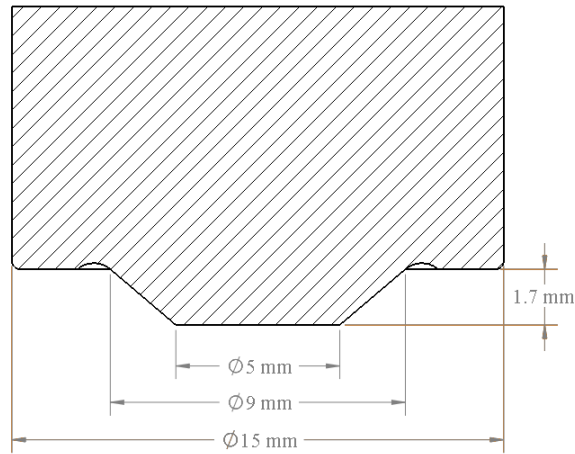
The geometry of the tool used in this friction stir welding study.
